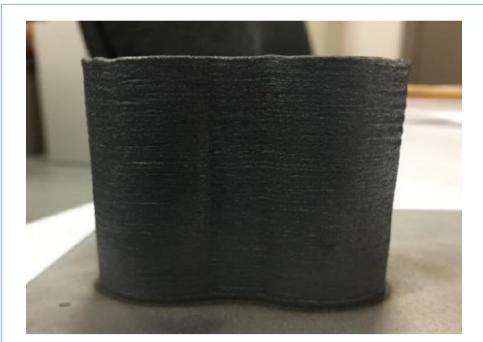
Single Wall Dumbbell Structure Fabricated from Stainless Steel 420LC
